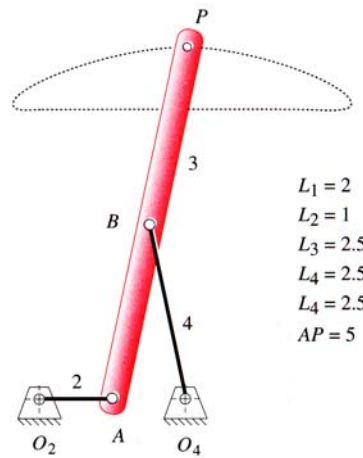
Detailed drawing of a Hoeken straight-line linkage showing the necessary link length ratios to achieve the straight-line approximation [2].
